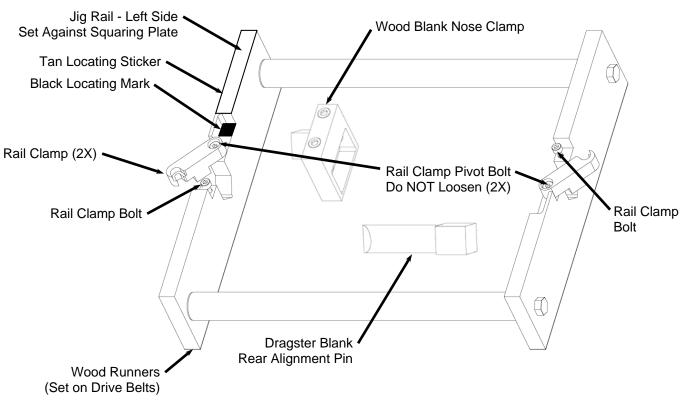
THE CARVEWRIGHT DRAGSTER JIG PARTS
